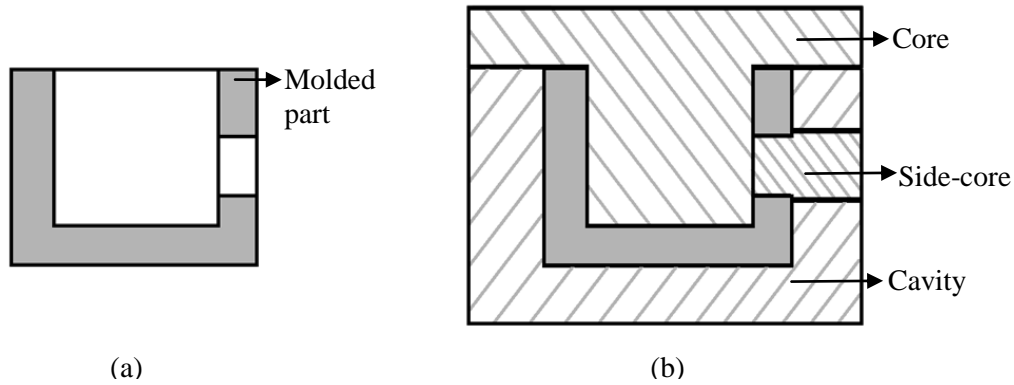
(a) An injection molded part and (b) assembly of mold tools to shape the part.
